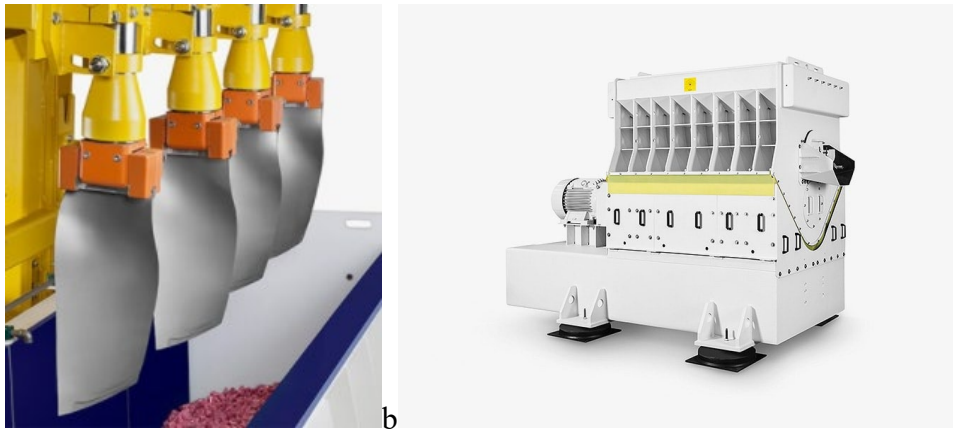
(left) four robotic arms for holding turbine blades for vibrofinishing process and (right) trough vibrofinishing machine [9]
